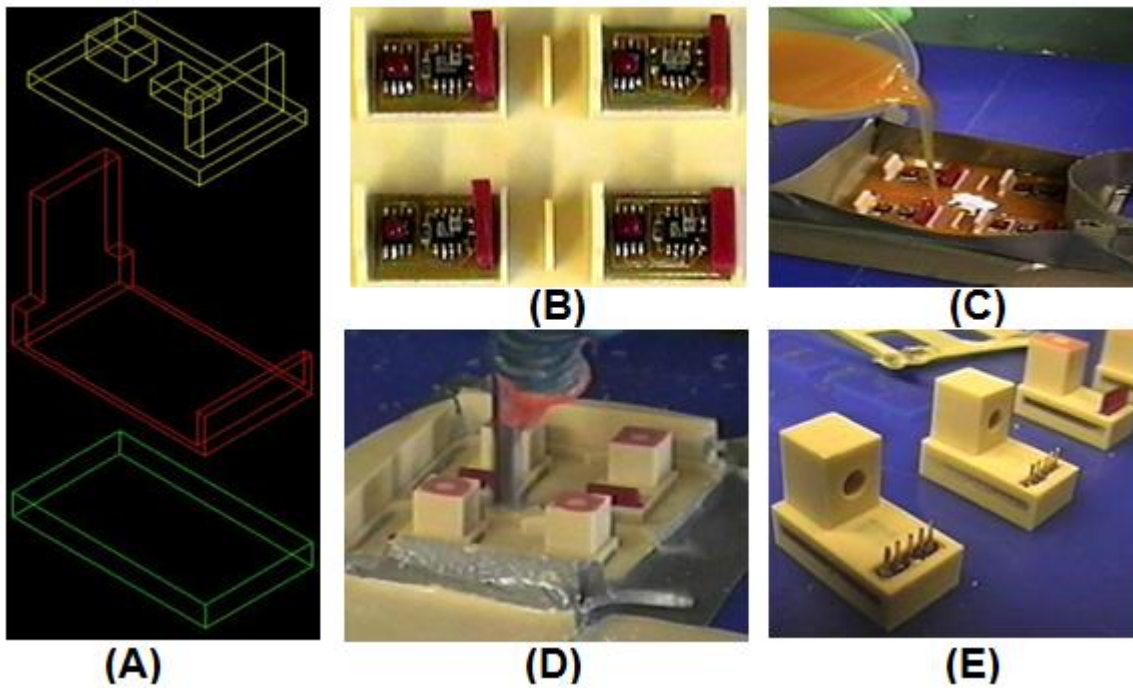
An example of SDM manufacturing process: Designing (A), Embedding process after machining the mold (B), Depositing the part material (C), Machining (D), and Releasing from mold (E). [29]
